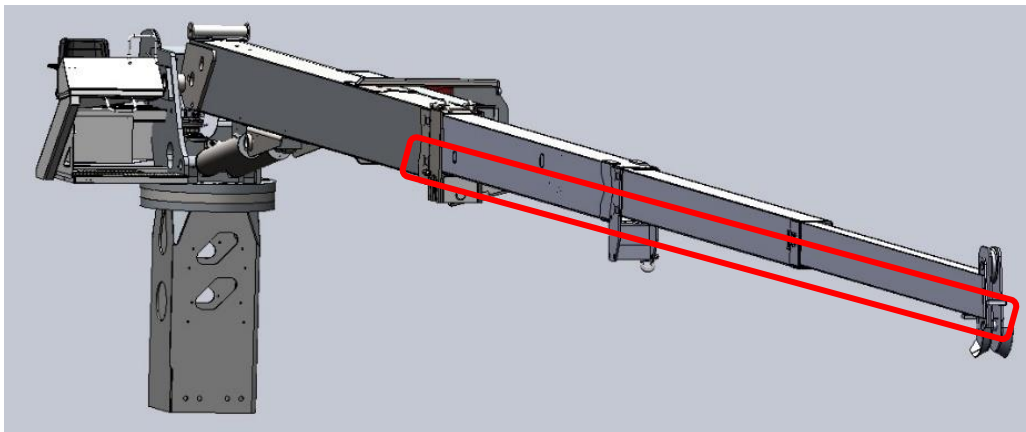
General Digger Derrick: Weld to Inspect – 2<sup>nd</sup>, 3<sup>rd</sup>, and 4<sup>th</sup> Booms
